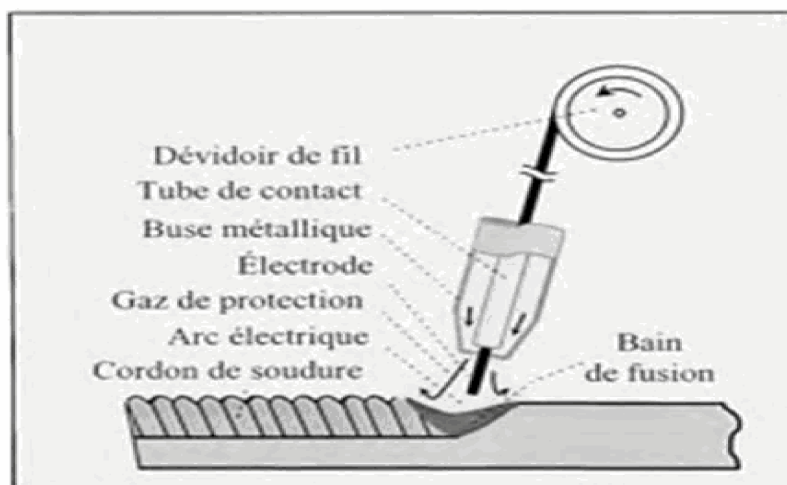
Illustration of Gas Metal Arc Welding [58].
